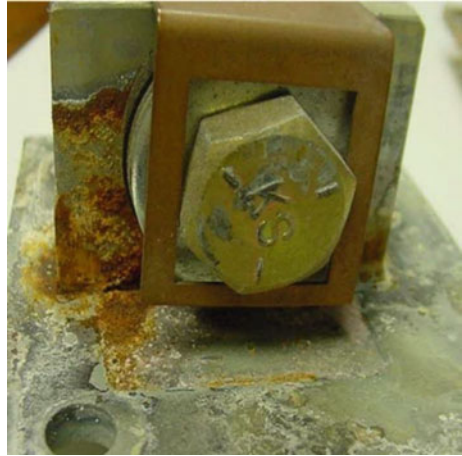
Pitting corrosion mechanism in a stainless steel, TB 765 [36]
